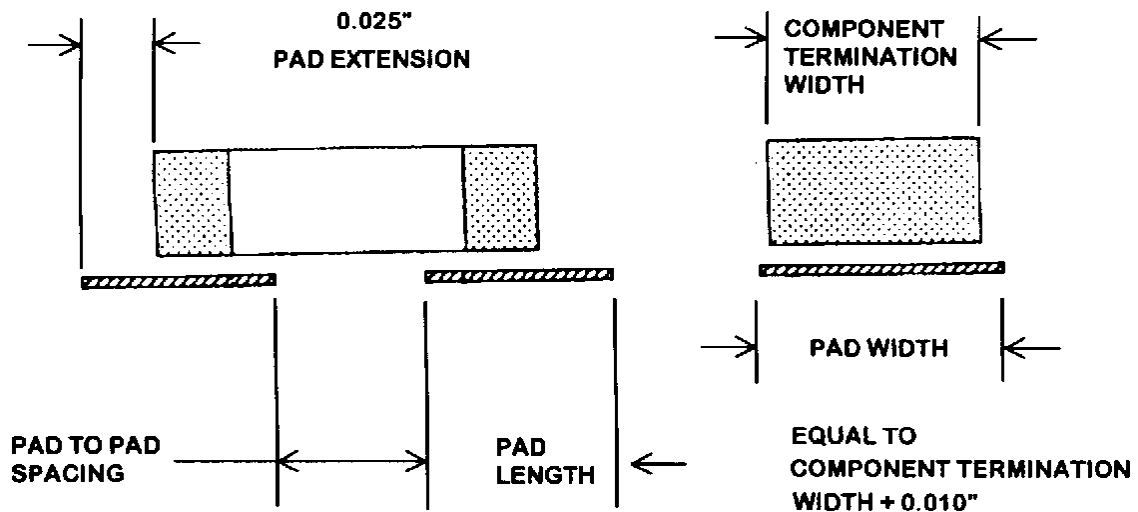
SOLDER PADS FOR CHIP COMPONENTS
